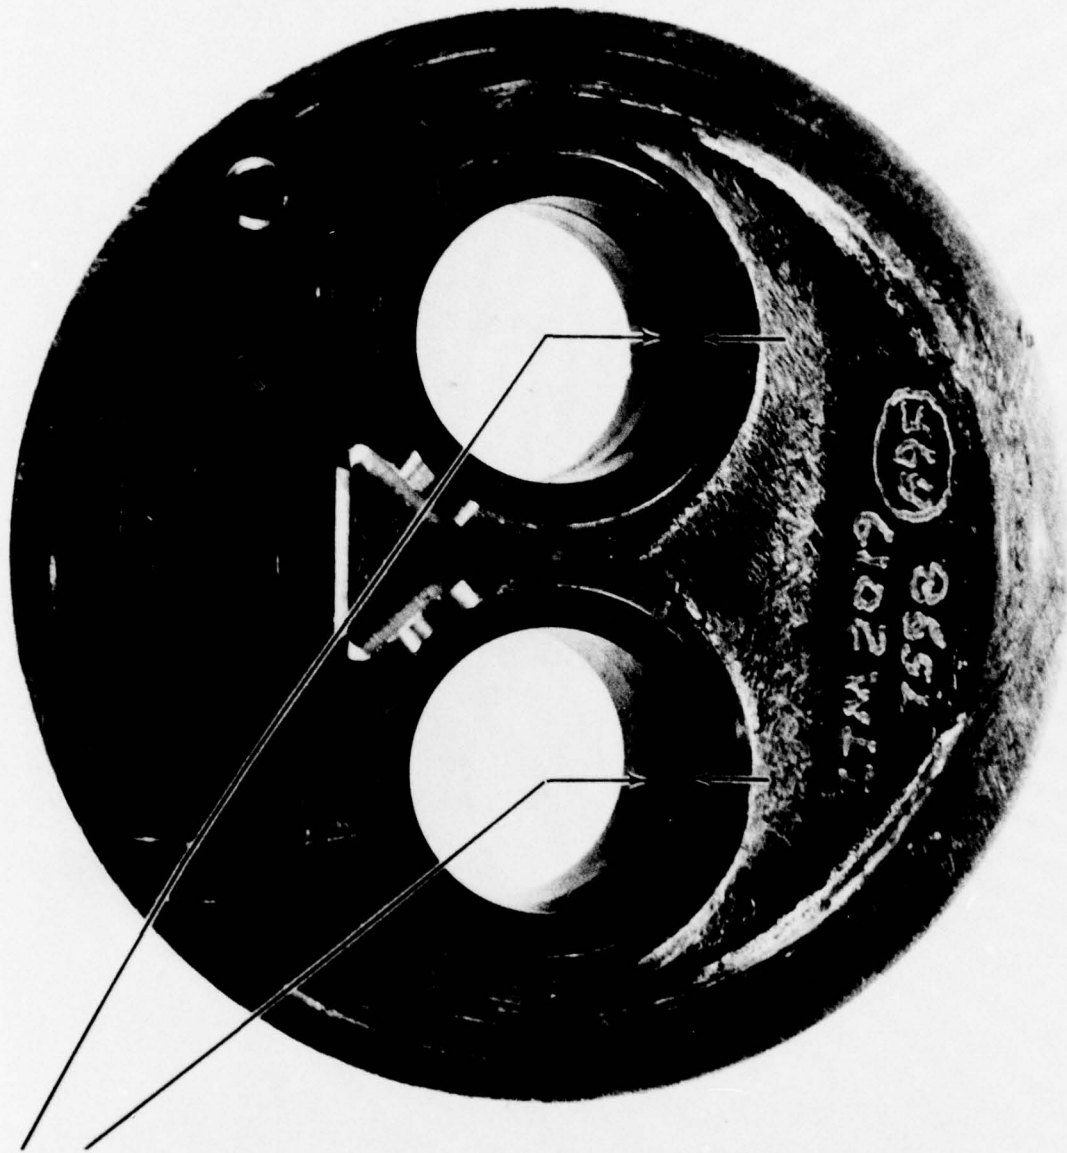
and 38 show the aluminum sleeves from the scavenge pump and supply pump, respectively. The pitted area on the inlet side of the sleeve is not cavitation damage. These small holes were caused by silicon spheres in the oil. Oil analysis showed spherical beads less than 60 microns in diameter. An F100-PW-100 Bill-of-Material filter was used and will pass any material less than 70 microns. Both pumps displayed this damage but S/N 2 (40 hours run time) was worse than S/N 1 (20 hours run time). The origin of the glass beads is suspected to be due to incomplete flushing of interior tank parts after grit blasting prior to final assembly.
